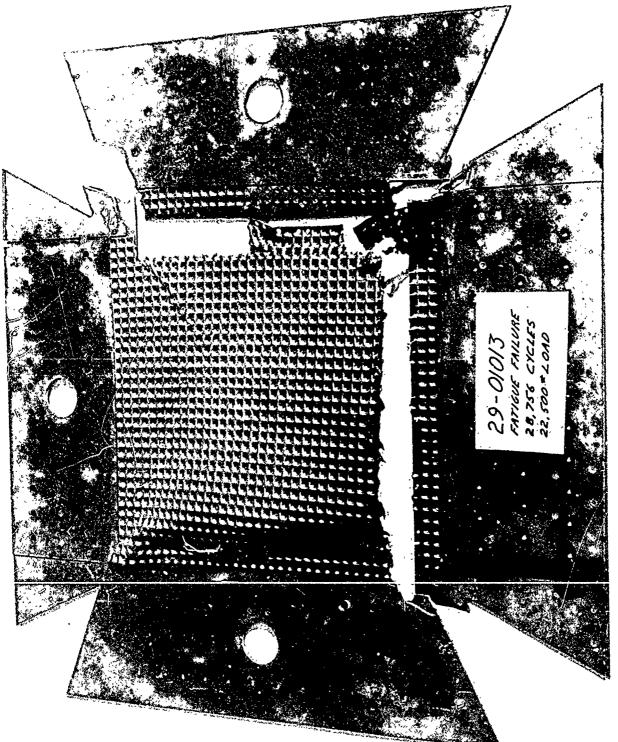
FATIGUE FAILURE OF 29-01013 PANEL; Stiffened Side.
